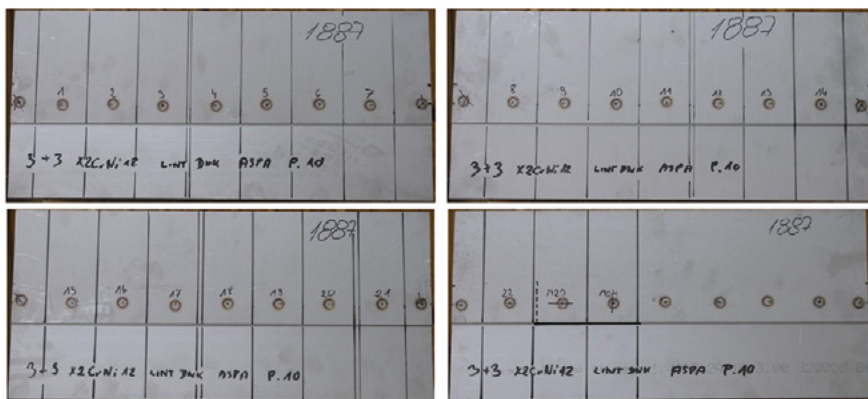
Examples of test sheets with spot resistance welded joints made of 3.0 + 3.0 mm-thick steel X2CrNi12
